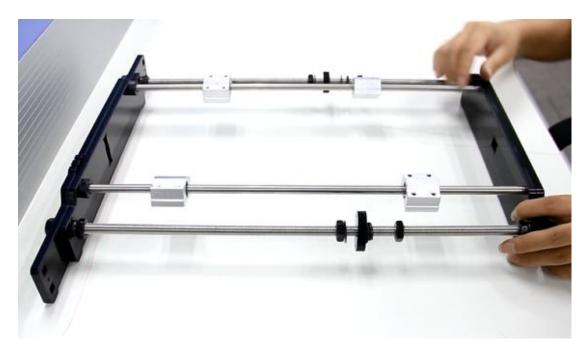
UU linear bearings in this instruction is the previous version,here we use PCS8UU instead. Picture is just for reference. The assembly is the same.
